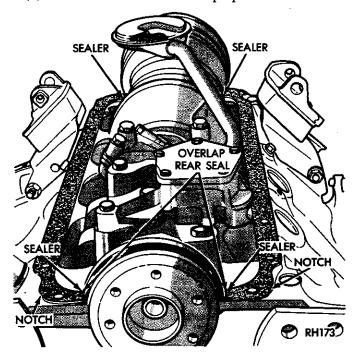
Oil Pan Gaskets and Rear Seal Installation
